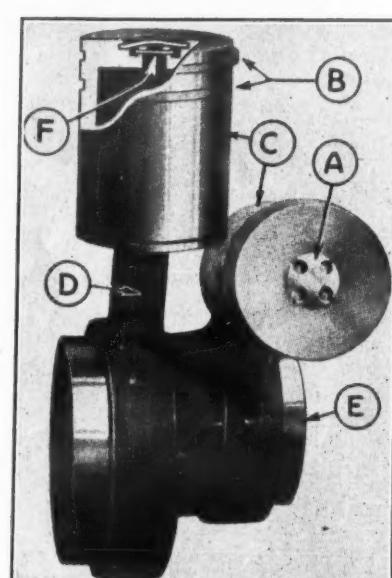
Pair of pistons. (A) piston valve retainer plate; (B) piston rings; (C) piston; (D) eccentric strap connection arm; (E) eccentric; (F) piston valve.
